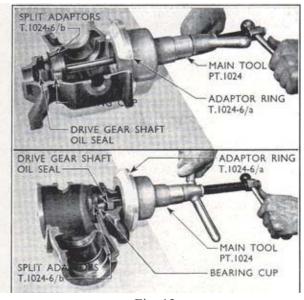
Housing Cut-away to show Removal (Top) and Replacement (Bottom) of Large Bearing Cup
